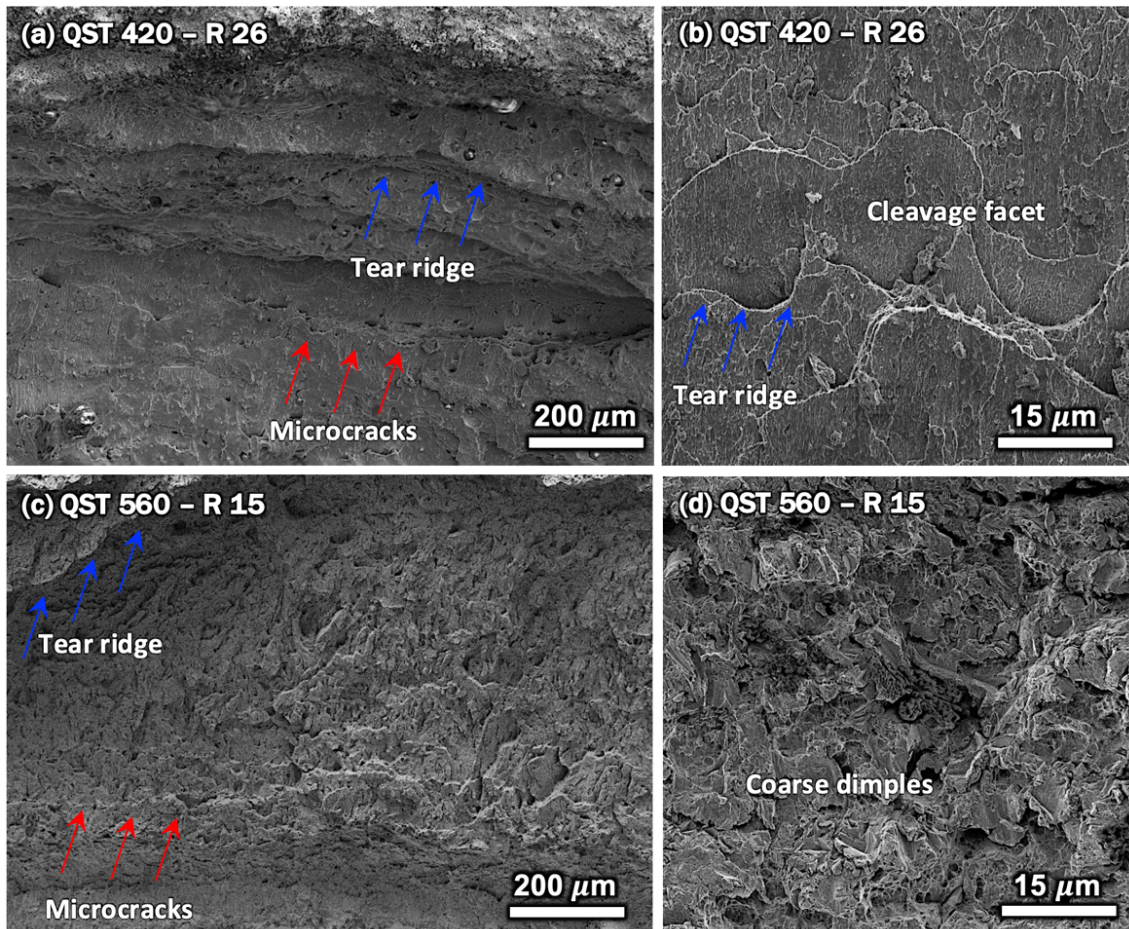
Fracture surfaces of damaged samples: a-b) QST 420 bent with a punch radius of 26 mm, and c-d) QST 560 bent with a punch radius of 15 mm.
